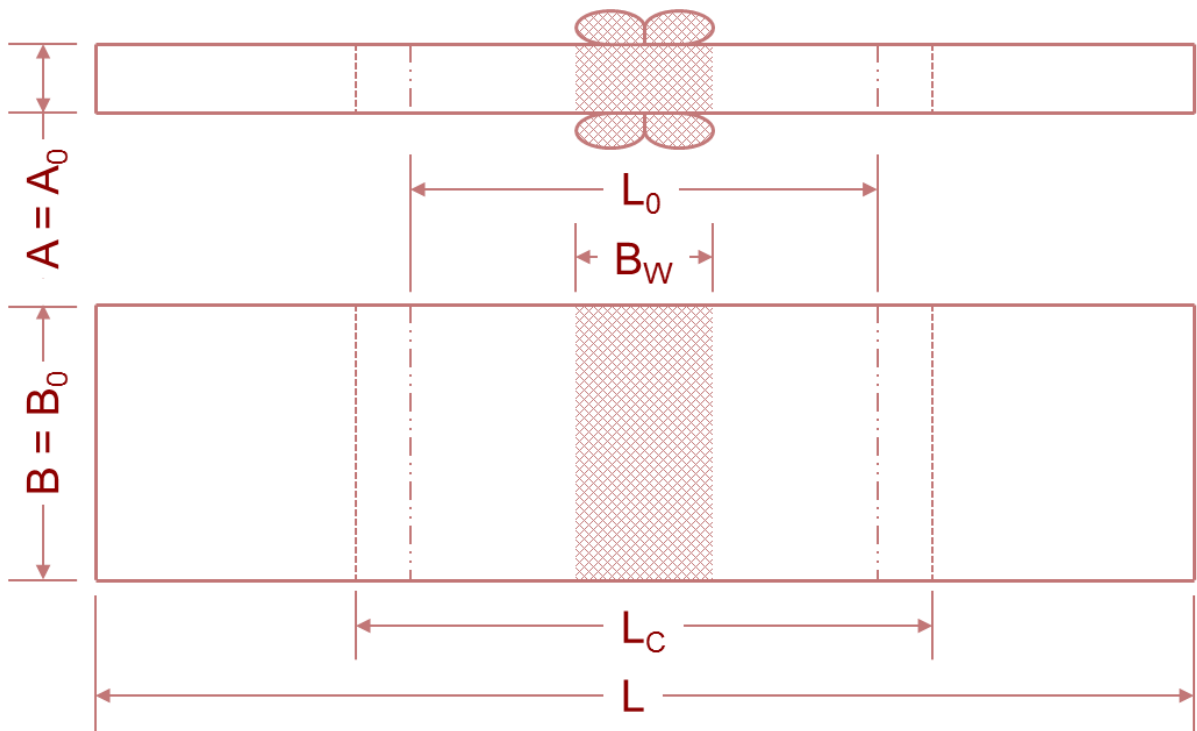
Type 1 test specimen for flat sheet and pipe assemblies from EN 12814-2 (BS, 2000a)
